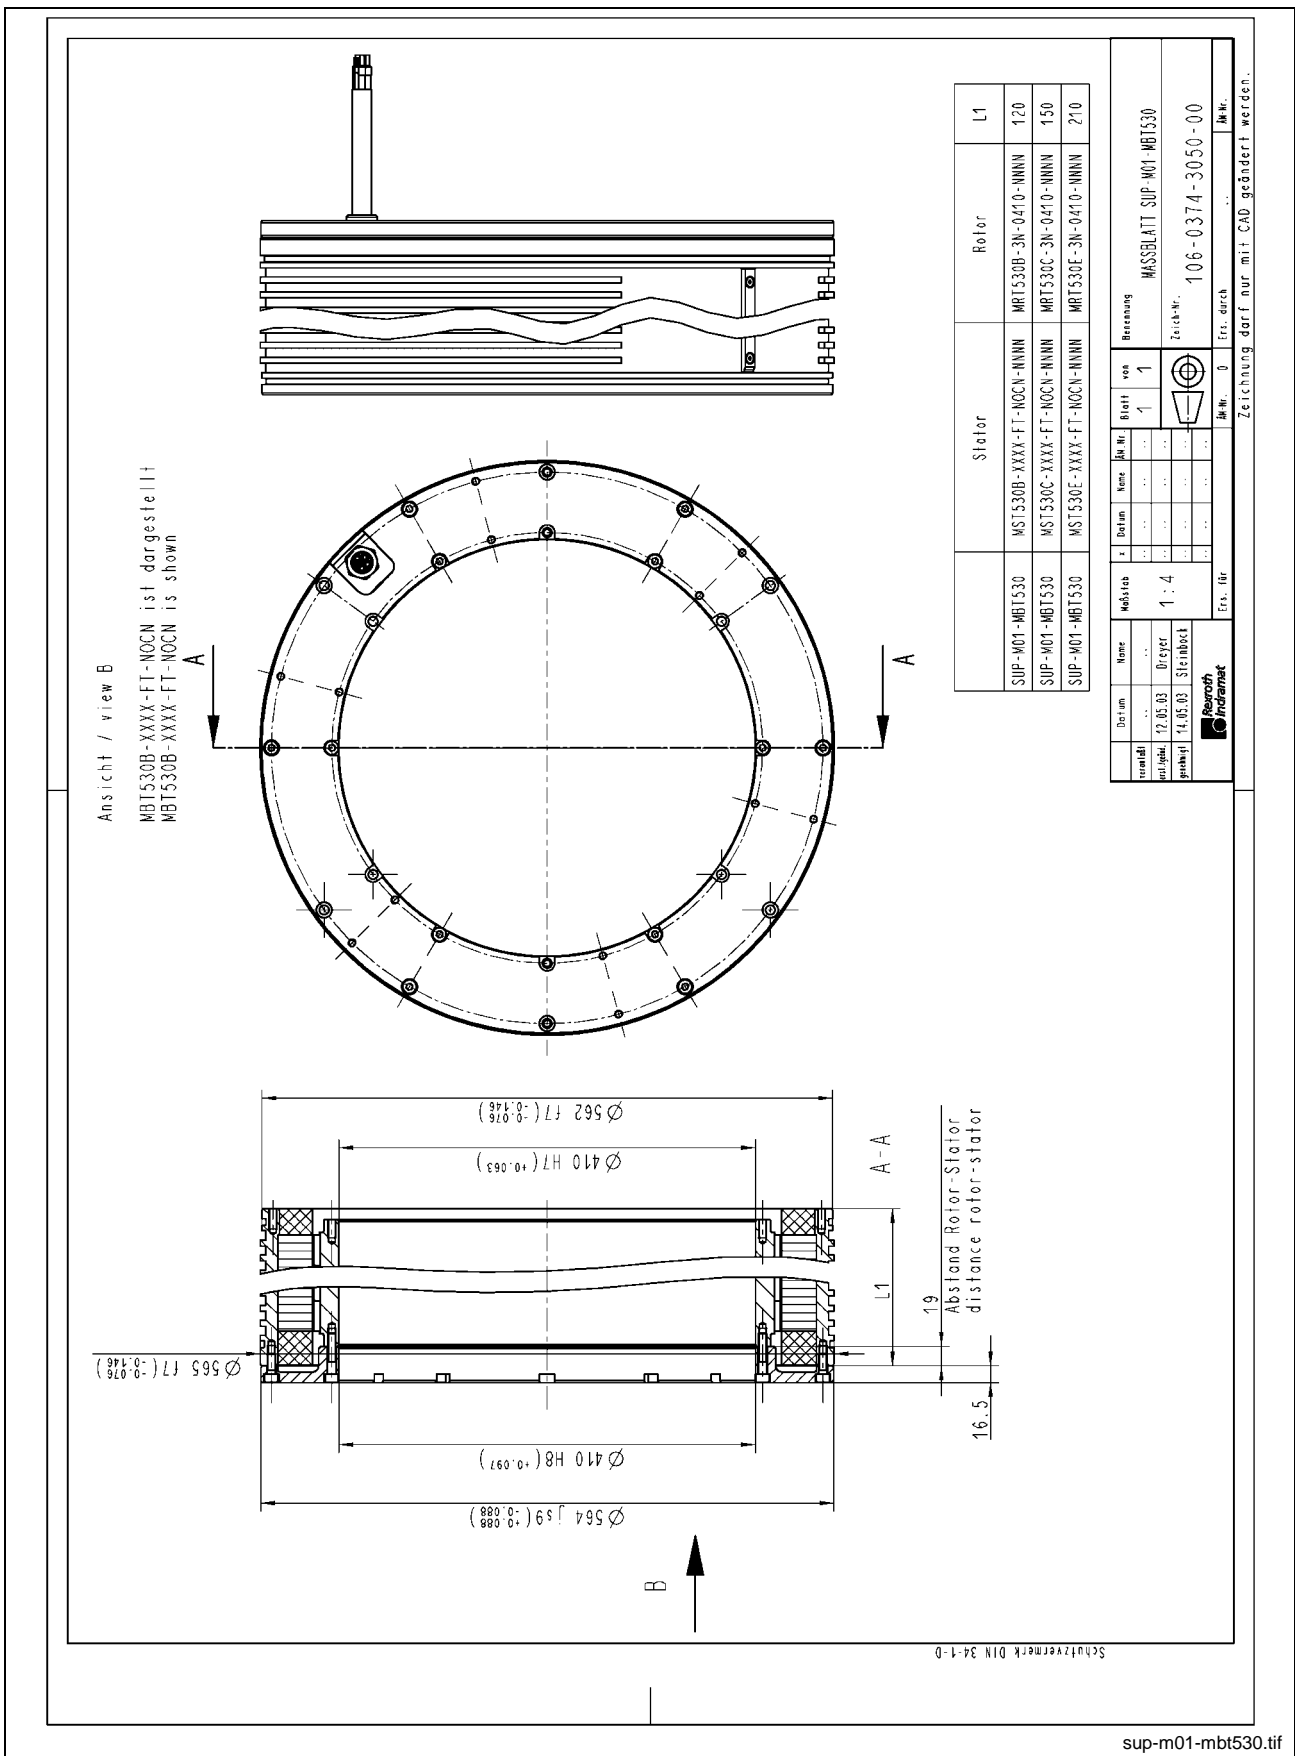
Dimension sheet for mounting ring in SUP-M01-MBT530
